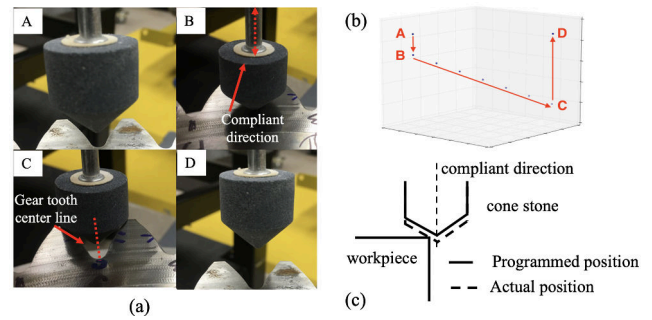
(a) Chamfering trajectory A: start, B: make contact at gear root, C: finish, D: break contact (b) schematic trajectory illustration (c) compliant mechanism in regulating position uncertainties along the tool axial direction
